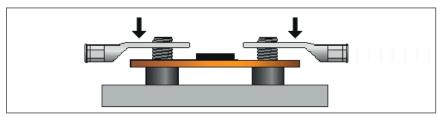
HV BM 1.2+S, power cable HV- (>35 mm²), placing the ring terminals on the threaded bolts
